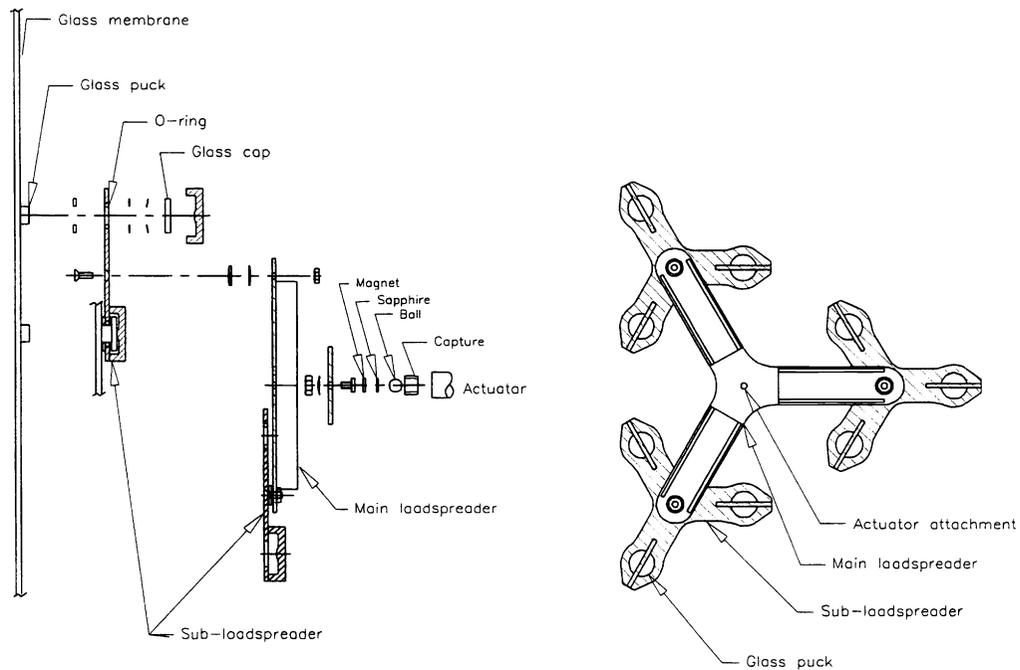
Exploded side view and assembly drawing showing the 9-point load spreaders and their attachment to the glass membrane.
